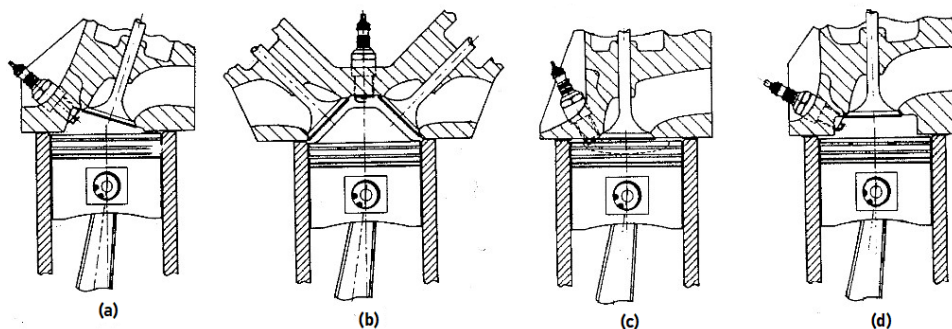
Combustion chamber for SI engines. Adapted from [7]. (a) wedge chamber; (b) hemispherical head; (c) bowl in piston chamber; (d) bath-tub head .
